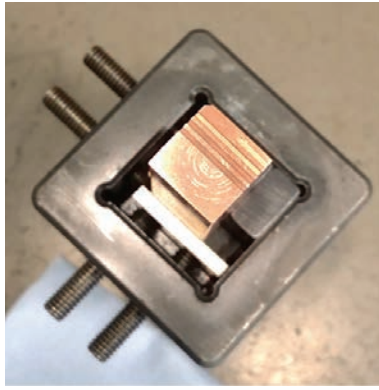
Electrode view from below: the trenches matches with the machining tests
